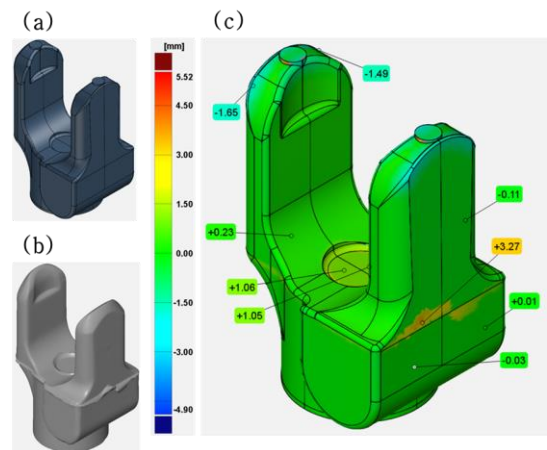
Comparison of dimension End yoke (a) end yoke model (b) 2nd forged end yoke (c) compare dimensions after merging
